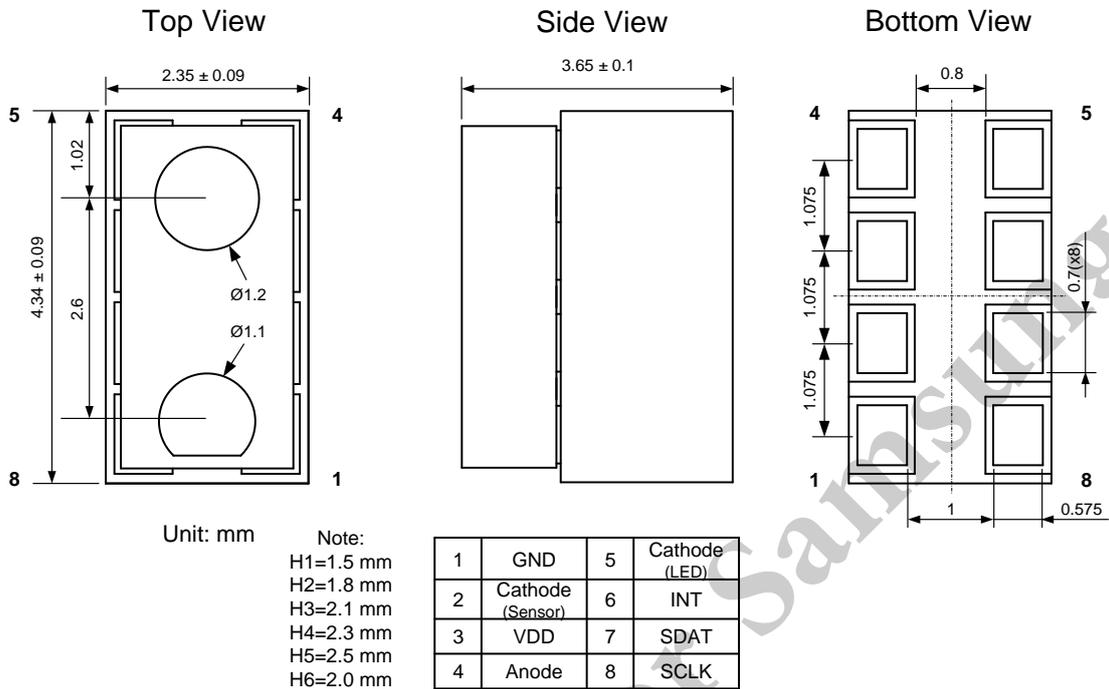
CM36652M3OE-H5 Package Dimensions
